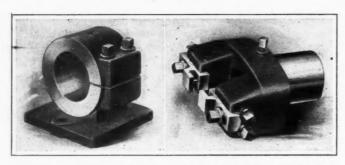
Standard Type of Toolholder used on Turret Slide of Gridley Automatic Turret Lathe
